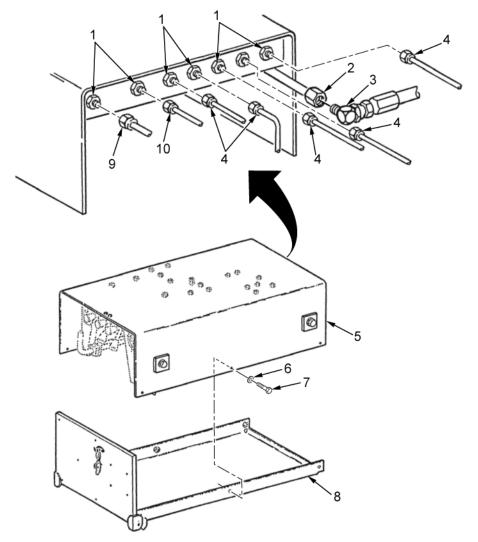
Hydraulic Control Module Frame Electrical Installation.
